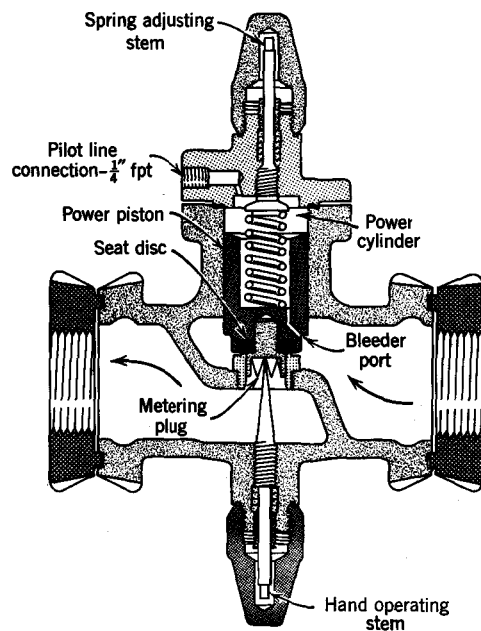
Liquid control valve—low pressure. (Courtesy York Corporation.)
